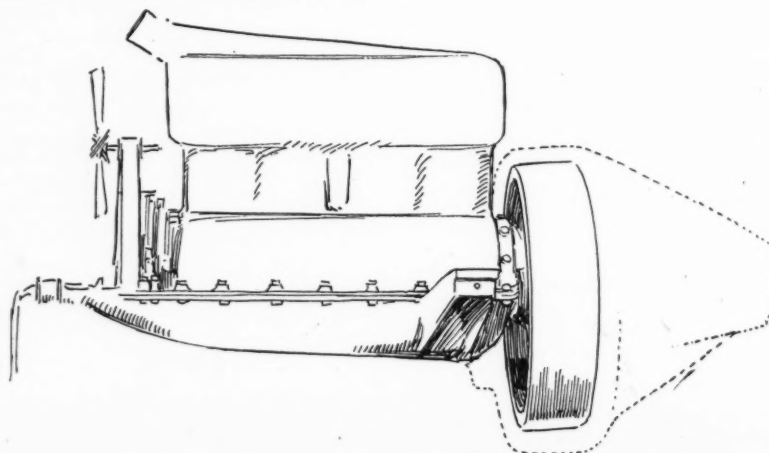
Ford engine remodeled so as to have exposed flywheel
